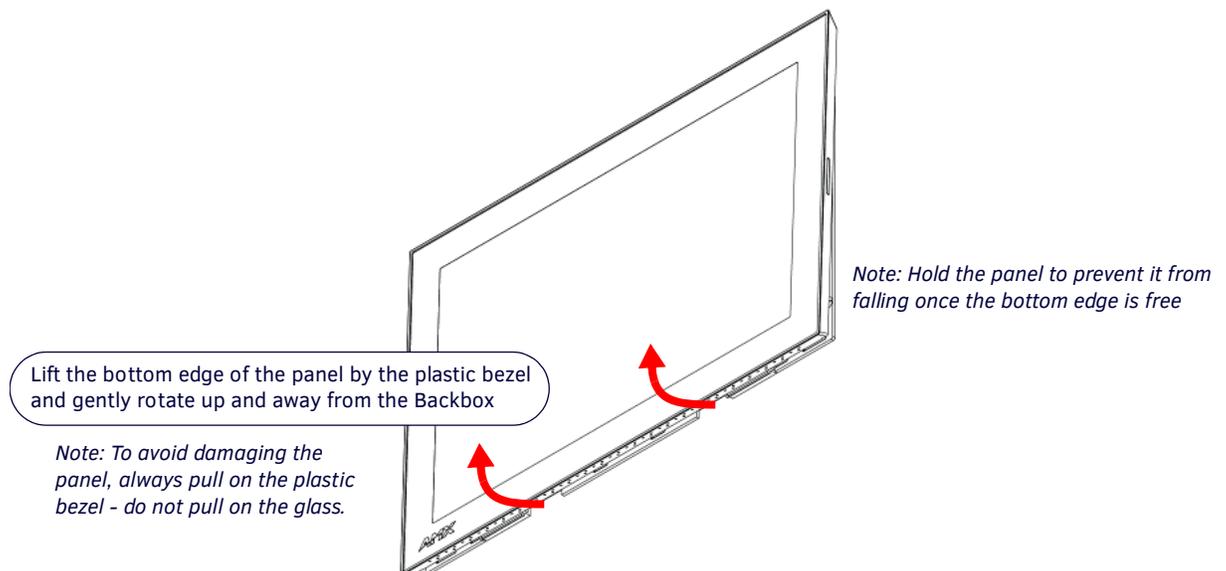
MSD-1001-L/2 BACKBOX ASSEMBLY (RELEASING THE BOTTOM EDGE OF THE PANEL)
